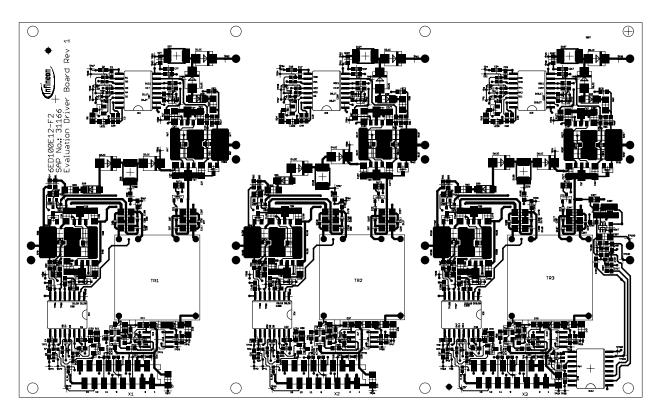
Assembly drawing of the EconoPACK™+ driver board
